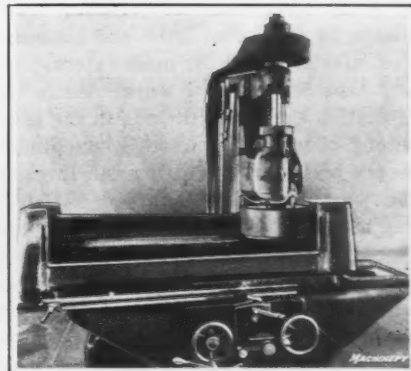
Milling Gib Keys on Special Machines equipped with Cutters that complete Work at a Single Operation
